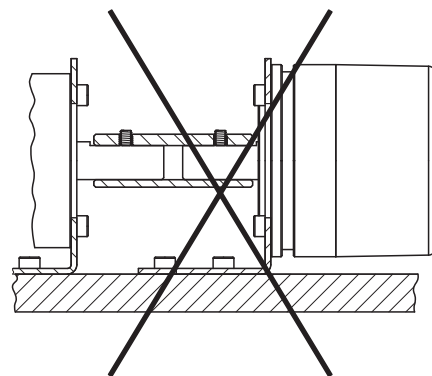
Mounting view — do not rigidly connect the device to shafts and flanges at the same time
